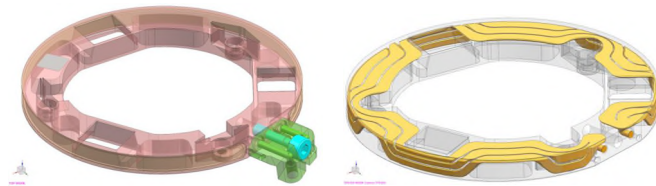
Thermal conditioning ring with milled cooling channels enclosed by a welded cover (left) and with additively manufactured conformal cooling channels (right). Courtesy of ASML.
